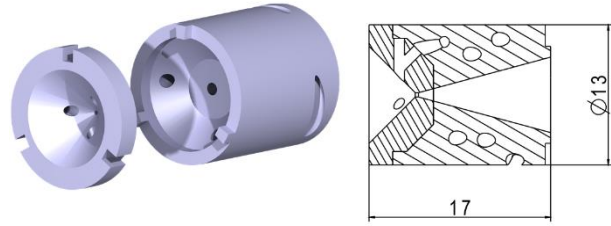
Design of an additively manufactured nozzle with a tungsten alloy insert
